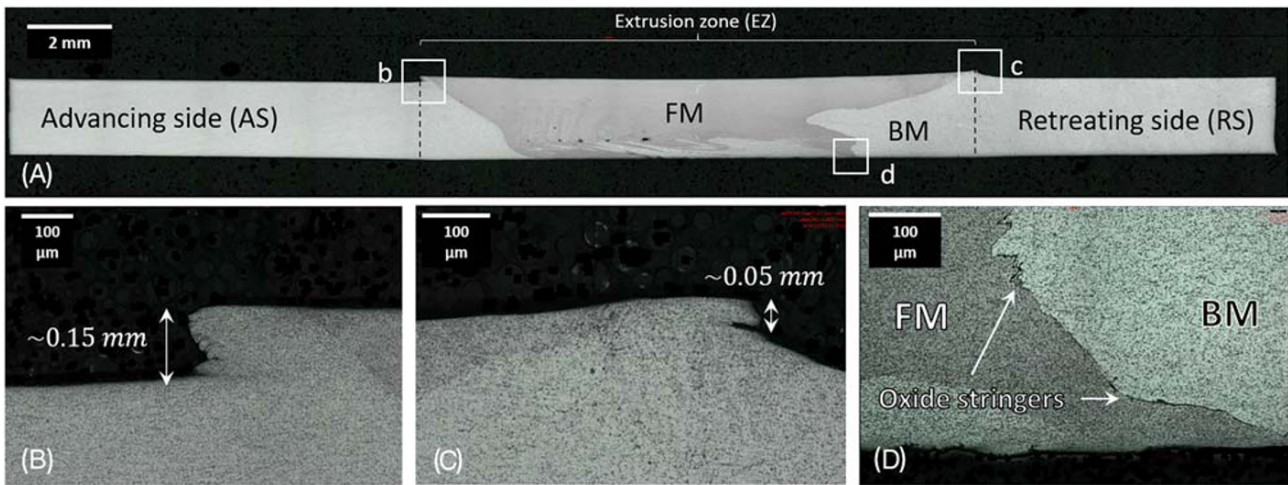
Optical macrographs of selected parts of the 2-mm HYB butt joint. (A) Picture taken at low magnification of the weld cross-section, (B) close-up of the sharp reinforcement edge observed on the AS of the joint, (C) close-up of the blunt reinforcement edge observed on the RS of the joint and (D) close-up of the FM–BM interface in the root region on the RS of the weld highlighting the embedded oxide stringers along the bond line. BM, base metal; FM, filler metal [Colour figure can be viewed at wileyonlinelibrary.com]
